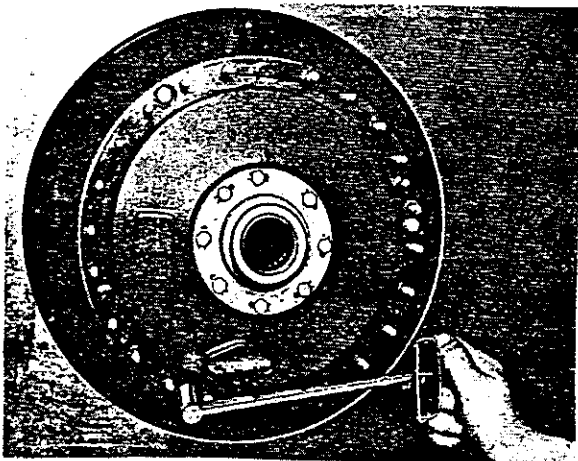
Securing Power Output Drive Gear to Inlet Housing
